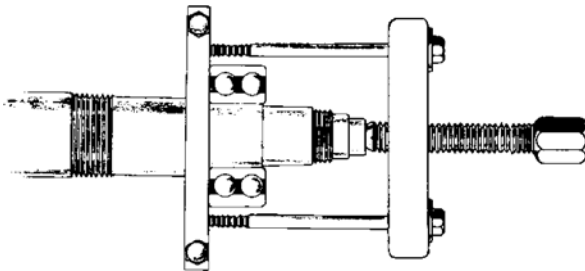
Bearing puller for units with bearing housings that slide off bearings
